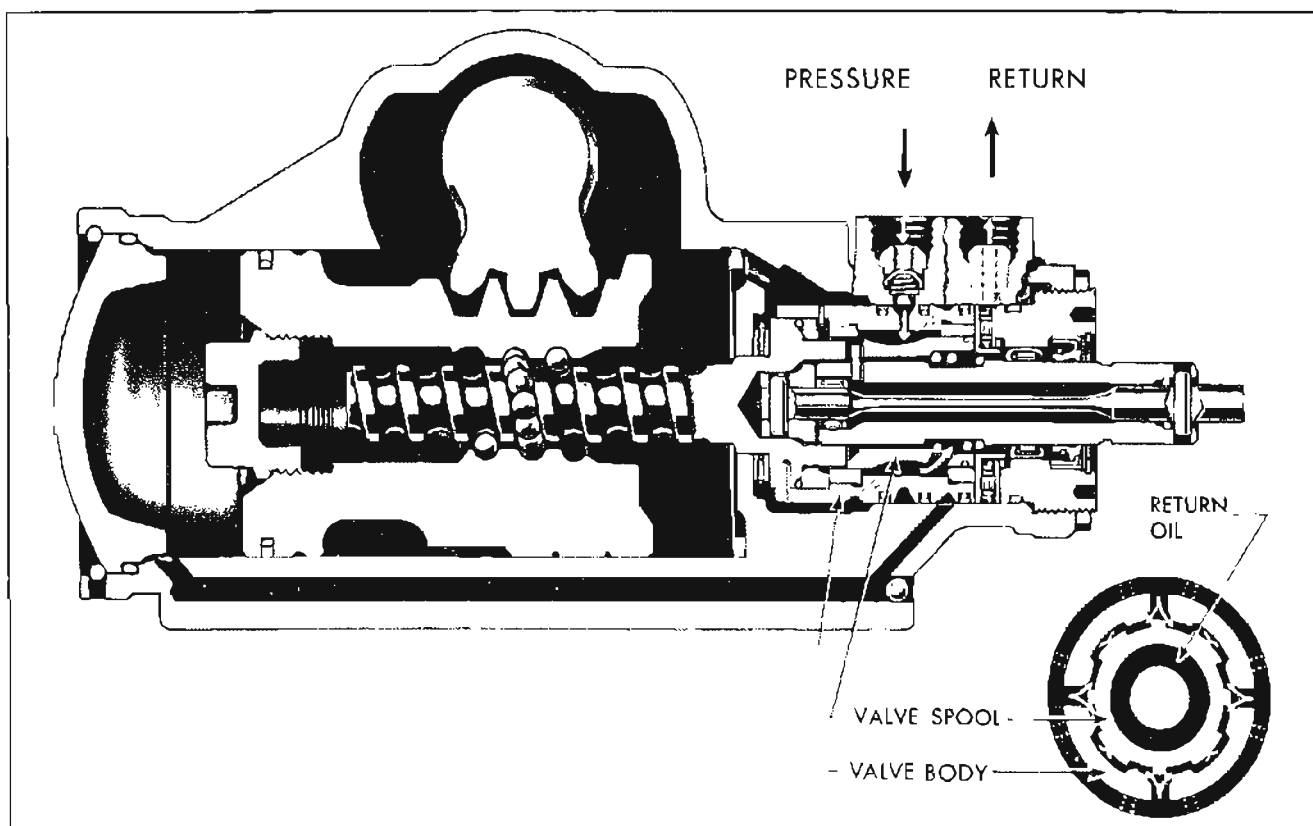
Oil Flow in Power Steering Gear - Straight Ahead Position
